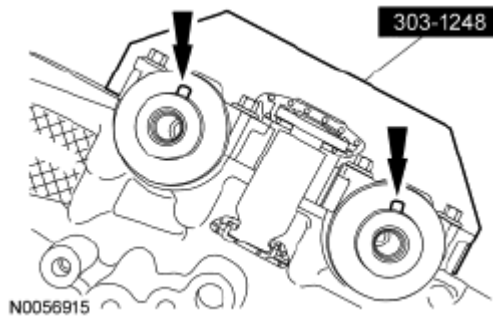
Identifying Camshaft Holding Tool Onto Flats Of Camshafts
